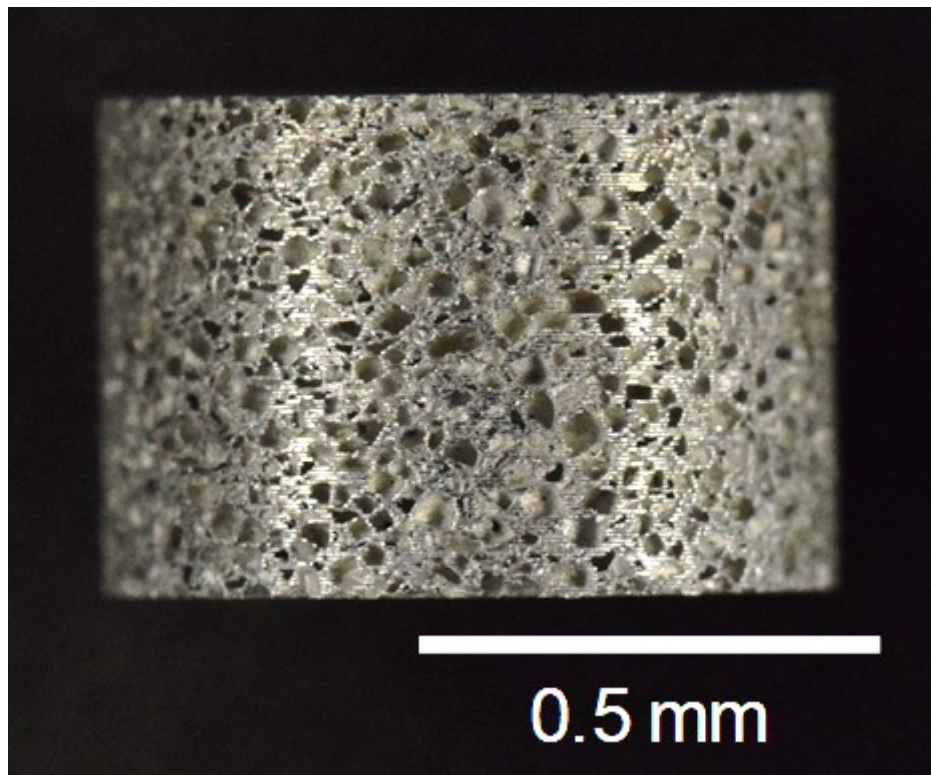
Appearance of porous aluminum fabricated by sintering-space-holder method.
